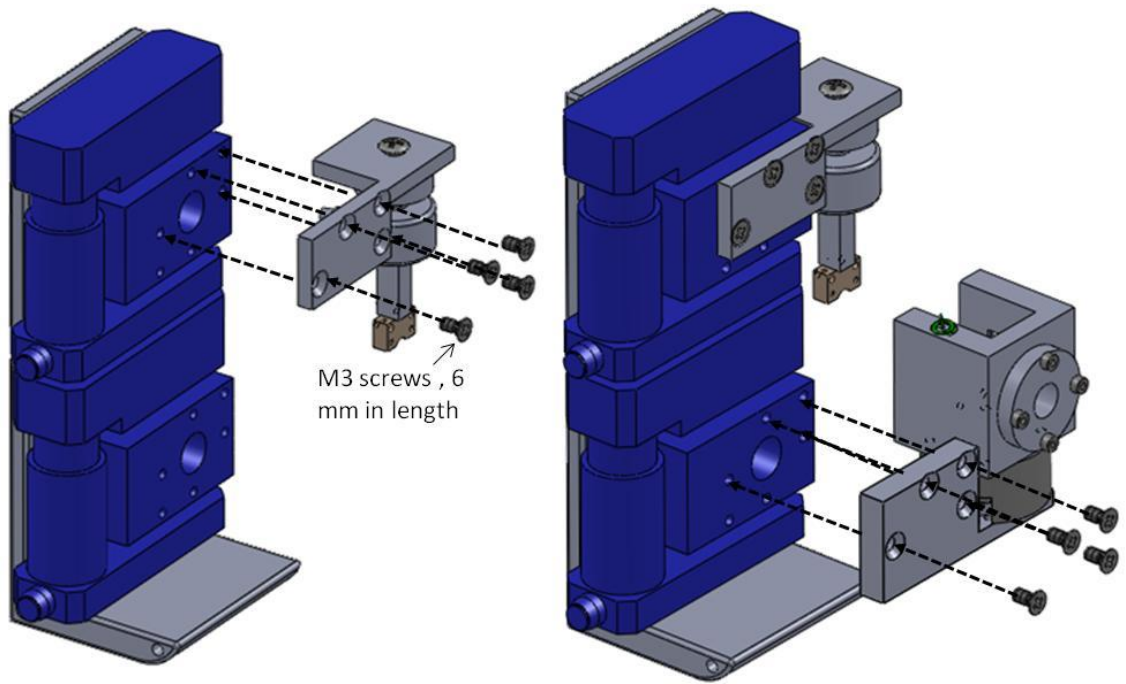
Load cell and top sample holder assembly to the upper arm - Place the sample holder inside the slot of the metal component and screw in M3 grub screw to secure the holder inside the hole
